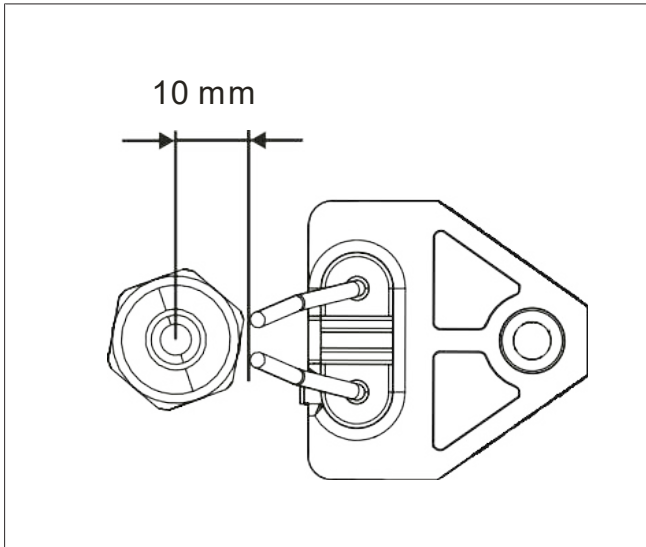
Distance between ignition electrode and fuel nozzle tip
